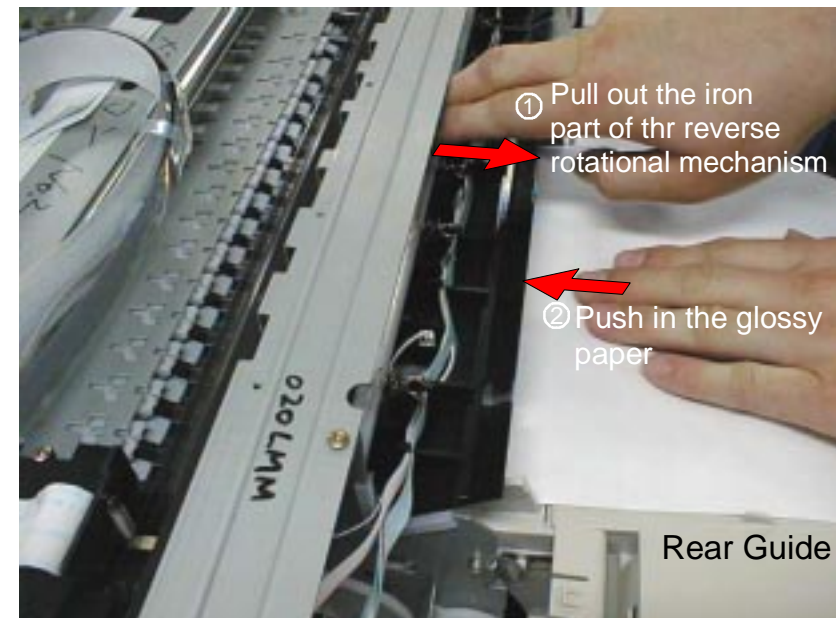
Setting the Glossy Paper At the Parallelism Adjustment
